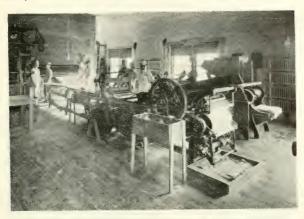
DOUGH ROLLER AND CUTTING MACHINE
